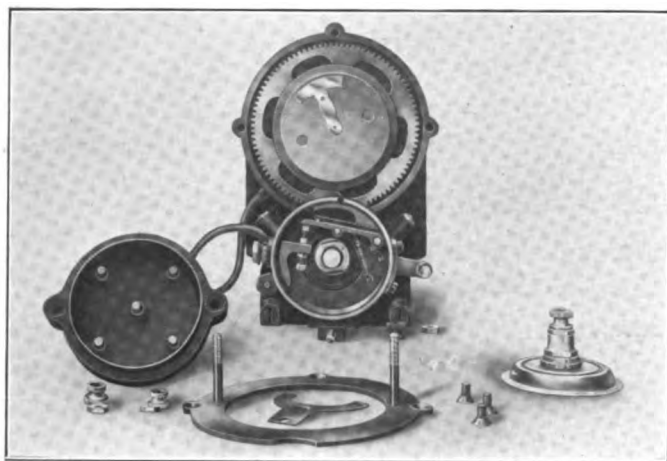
Showing the Splitdorf Magneto with Distributor Block, Breaker Box Cover and Housing Removed.
